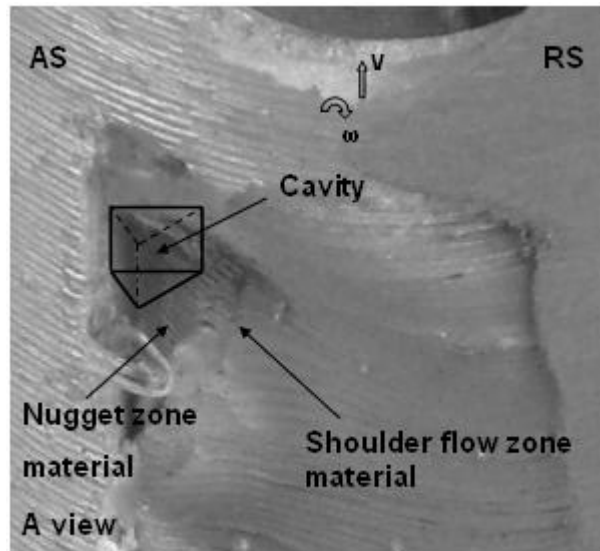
shows a scroll shoulder tool and FSW welds of 20mm thick Al plate obtained in the preliminary investigation, and Figure 1-14 presents the enlarged view of the area 'A' of Figure 1-13 (b). As can be seen in Figure 1-13 (b) and (c), the severity of surface defects and internal voids formed in the weld varies when the scroll shoulder was used at different depths of shoulder penetration.
